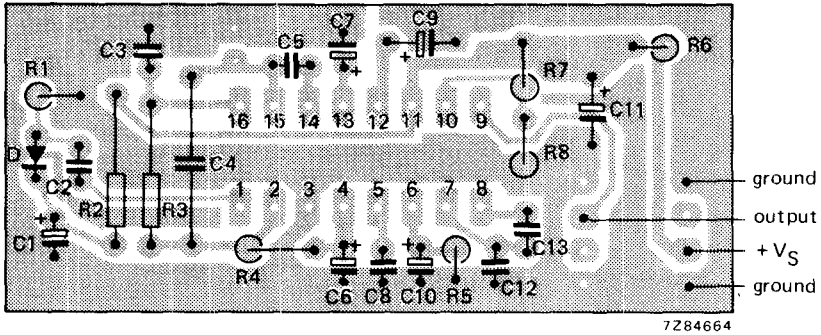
Component side of printed-circuit board showing component layout used for the circuit of Fig. 7.
